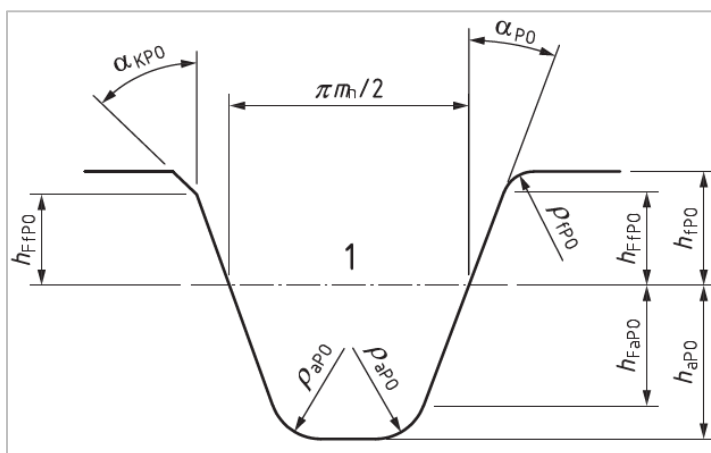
Definition of reference profile of a tool as hob. The lengths are measured at, or from, the reference line.
